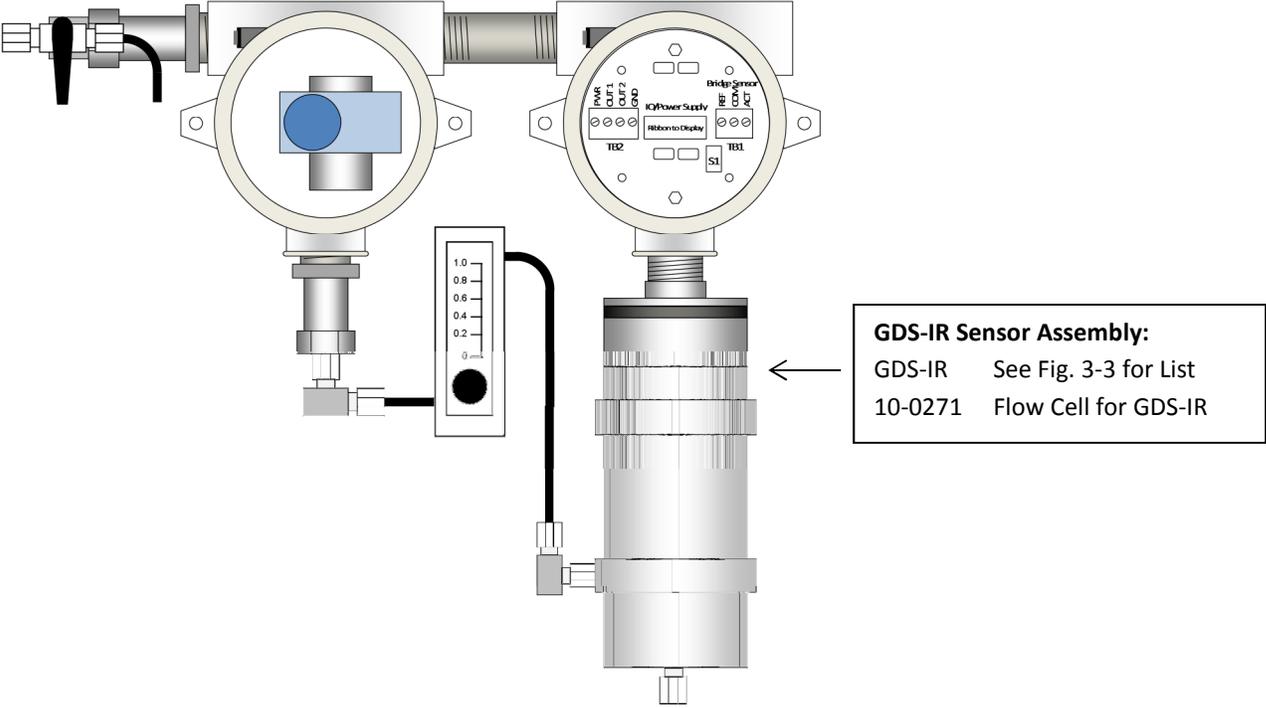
GDS-58NXP Assembly with GDS-IR (Spare Parts)
